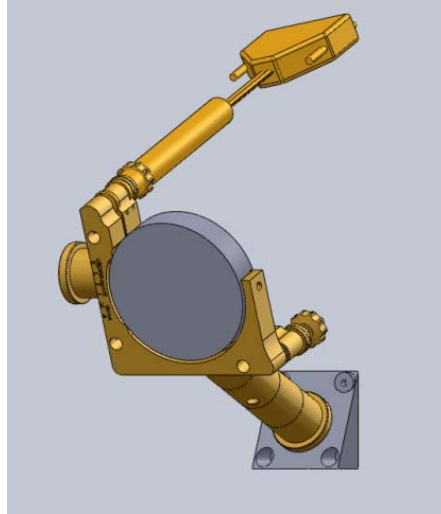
Scan mirror with required mounting pieces and actuator.
